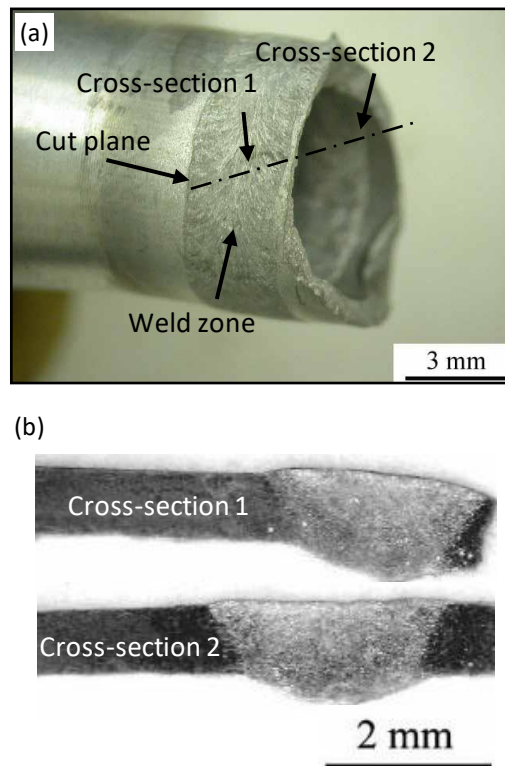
(a) Fracture zone of the fuel supply tube, and (b) fusion zone macrostructure of the tube circumferential butt welded joint.
